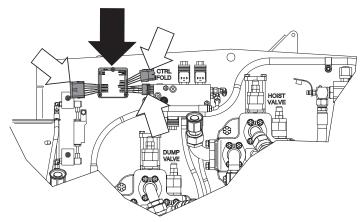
Hydraulic Fan Controller located on valve plate behind cab
